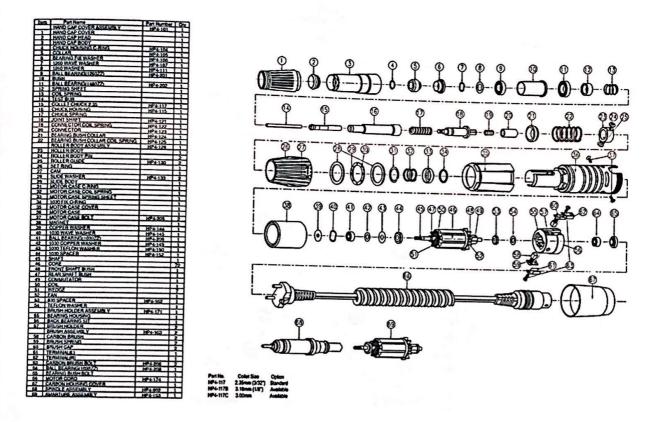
Part List of Handpiece and Sequence to Assemble the Handpiece (Source from Sun Burst Company)
